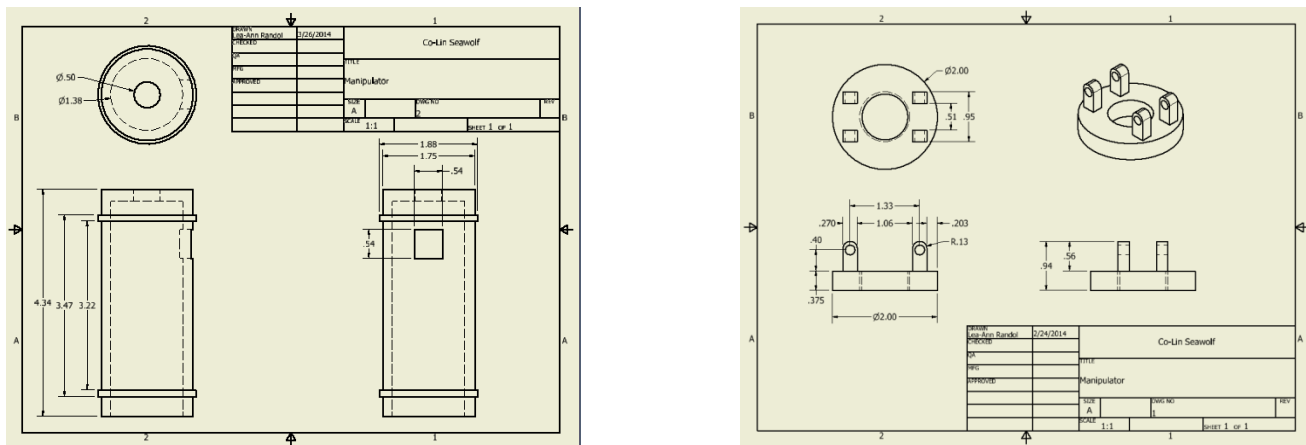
Technical drawings of the manipulators ABS printed actuator housing, and the aluminum alloy mount that the jaws mount on.
